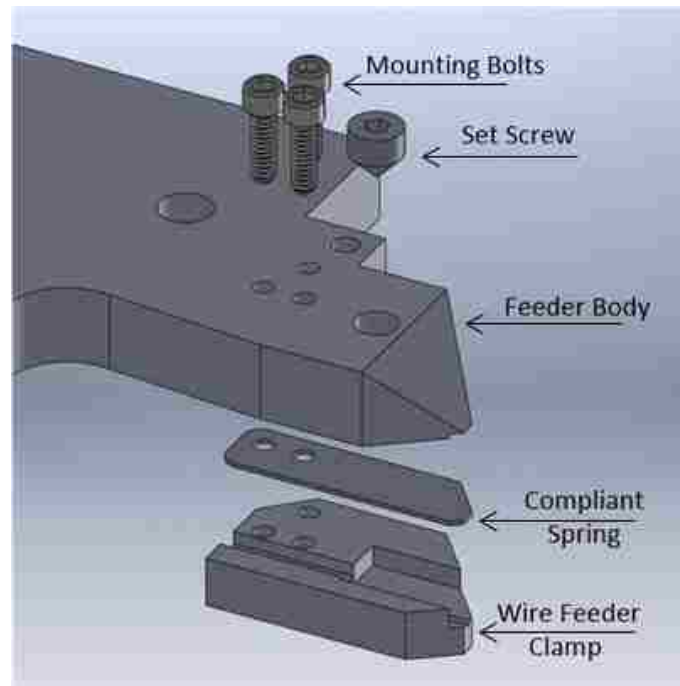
An Exploded View of the Wire Feeder Clamping Mechanism.
